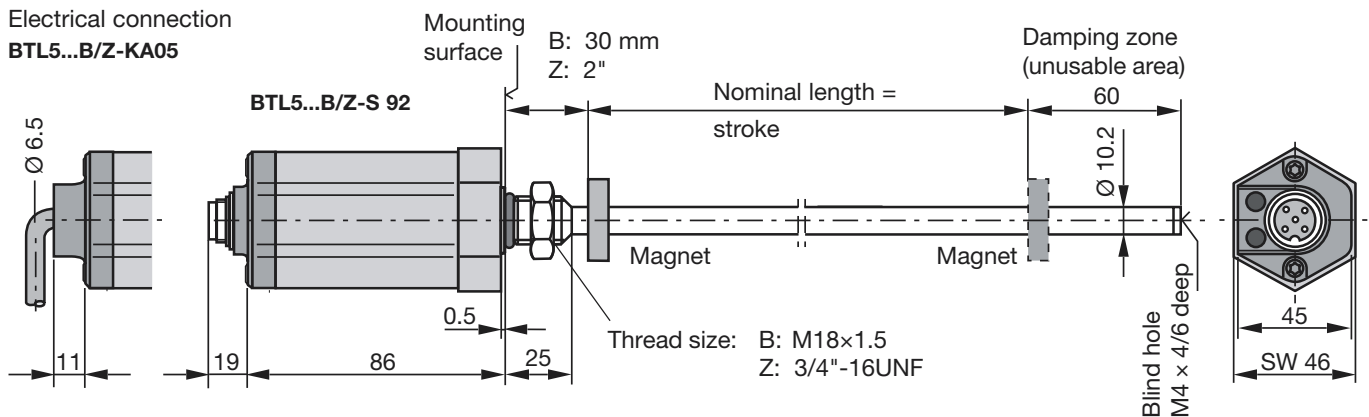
Transducer BTL5...B/Z-92, Dimensions
